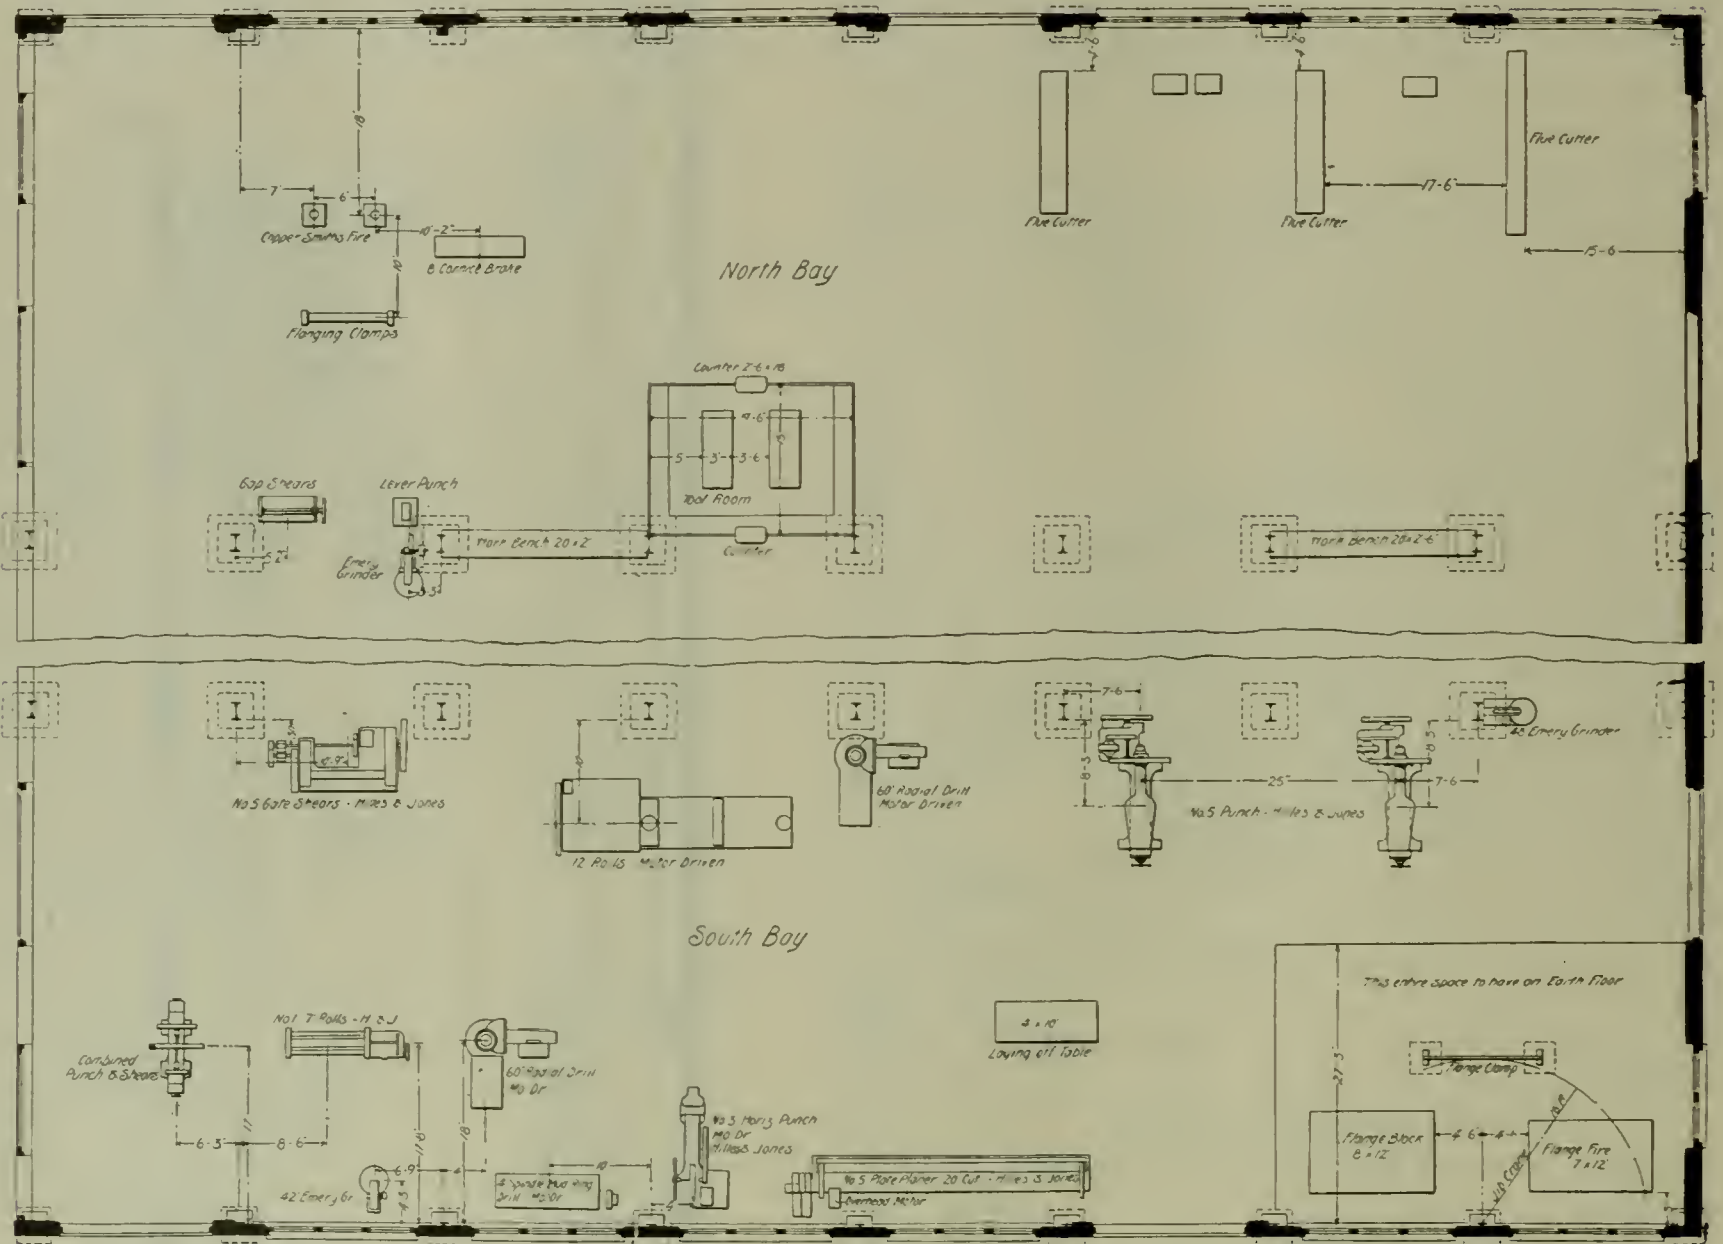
PLAN OF BOILER SHOP, SHOWING ARRANGEMENT OF TOOLS AND APPLIANCES—LOCOMOTIVE SHOPS AT TRENTON, P. R. R.
